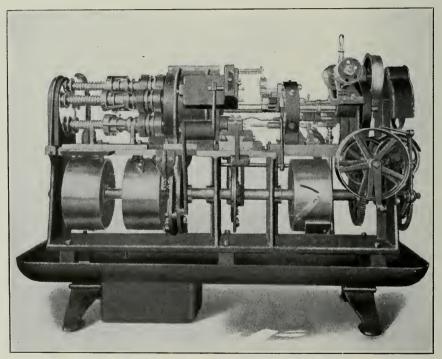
Universal Multiple-Spindle Automatic Screw Machine
